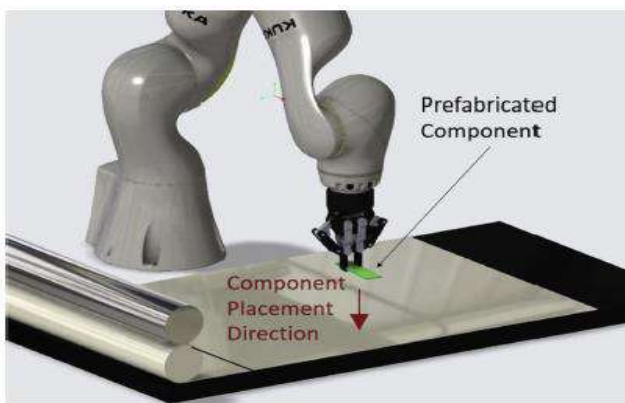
Illustration showing the sandwich assembly operation of a prefabricated components.
